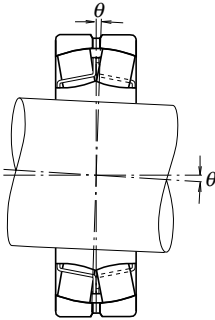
Permissible Misalignment of Spherical Roller Bearings
